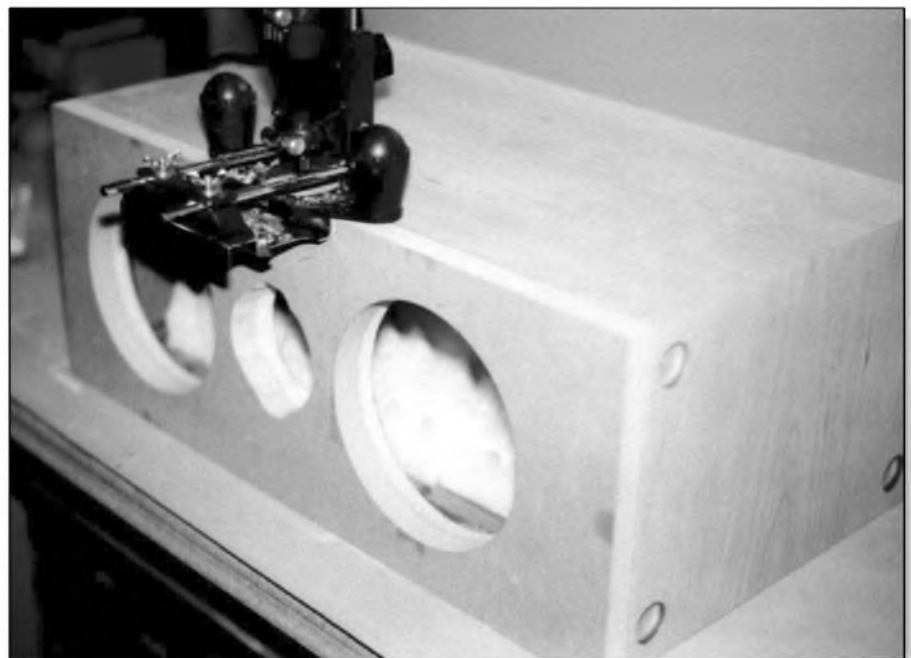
Cutting the reveal groove with Dremel tool on router base. Note: veneer is applied at this point.
